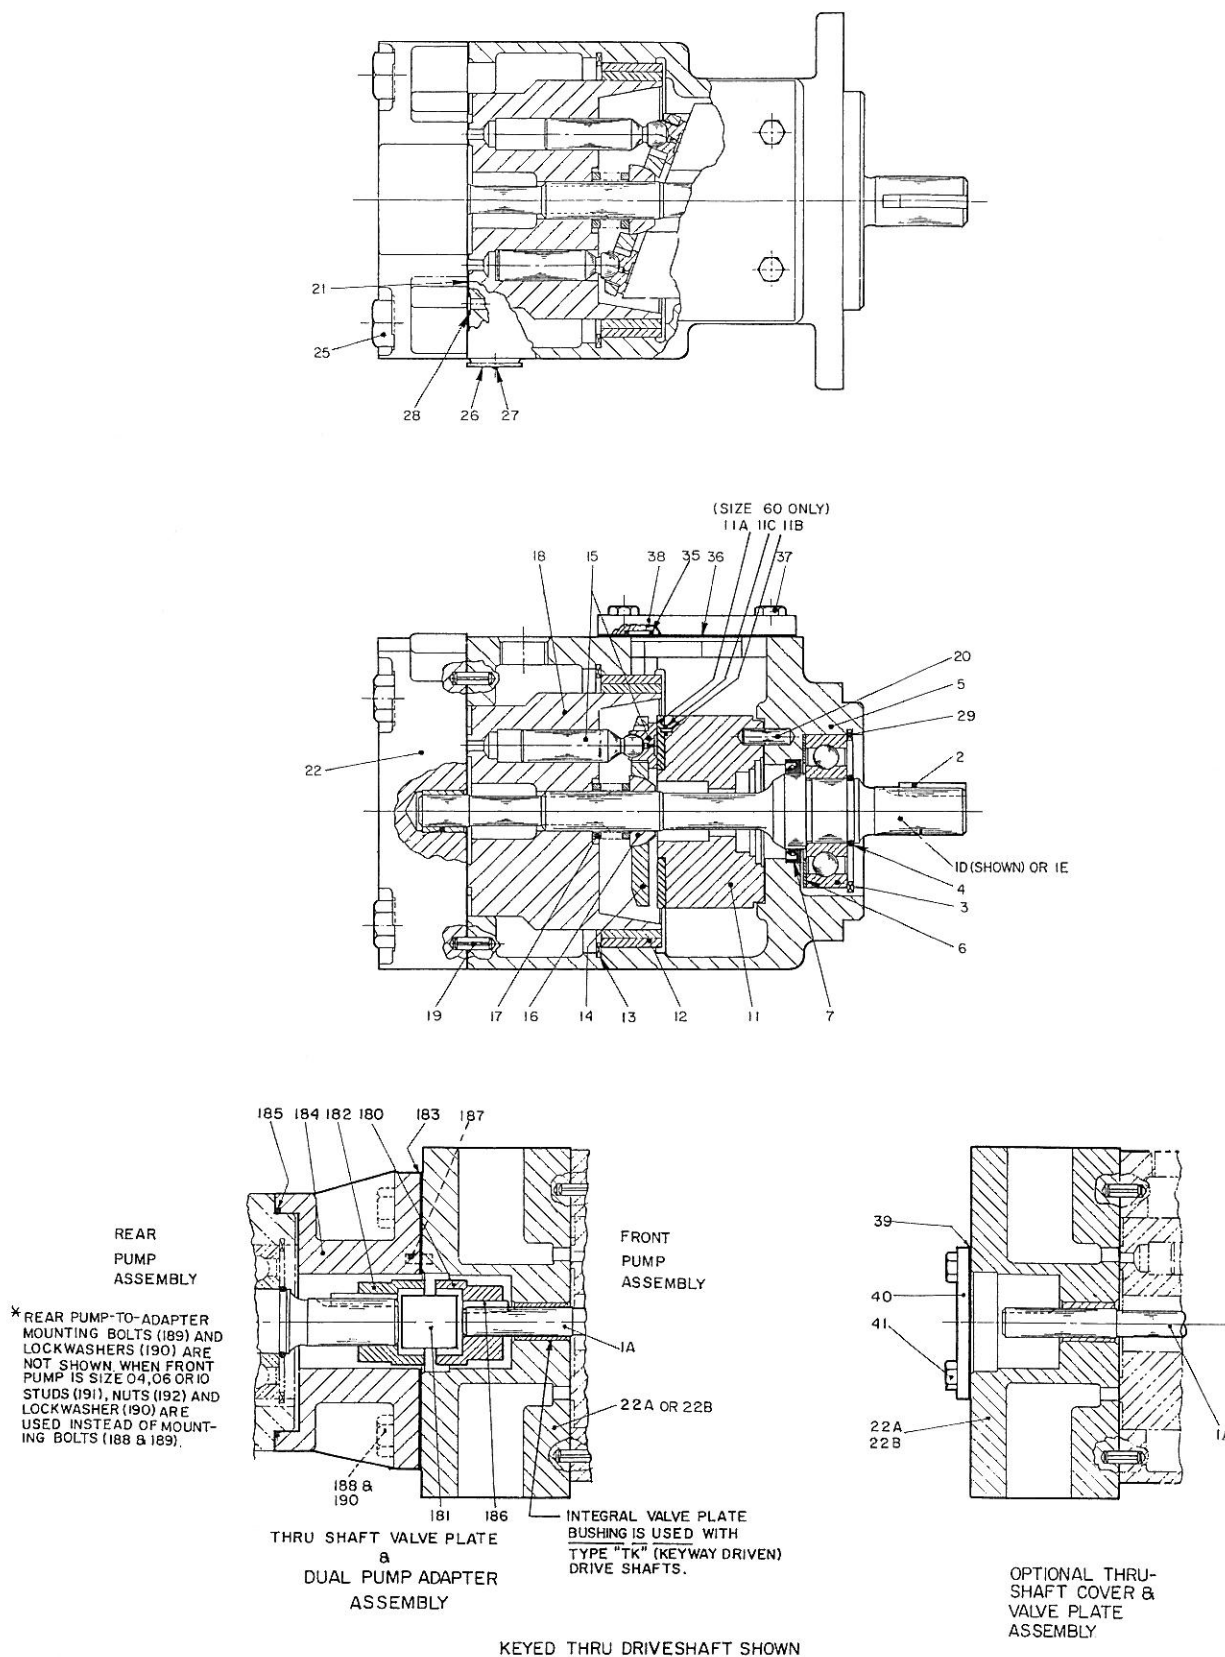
Parts Drawing, "PFWH", "PFWW" and "PFW" Pumps w/keyed Shafts (517474).
